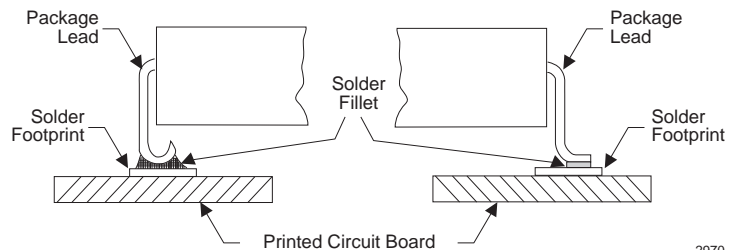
J-bend (left) and gull-wing (right) lead formations allow components to be mounted onto the surface of the circuit board.
